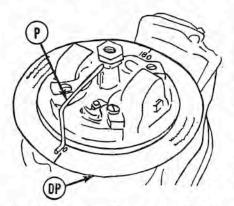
Synchronizing tool installed for adjusting the magneto points, Refer to text for details.
